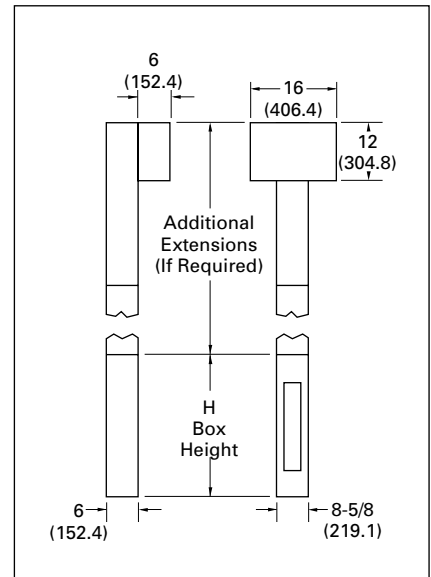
PRL1a-LX Trough Extension, Dimensions in Inches (mm)
